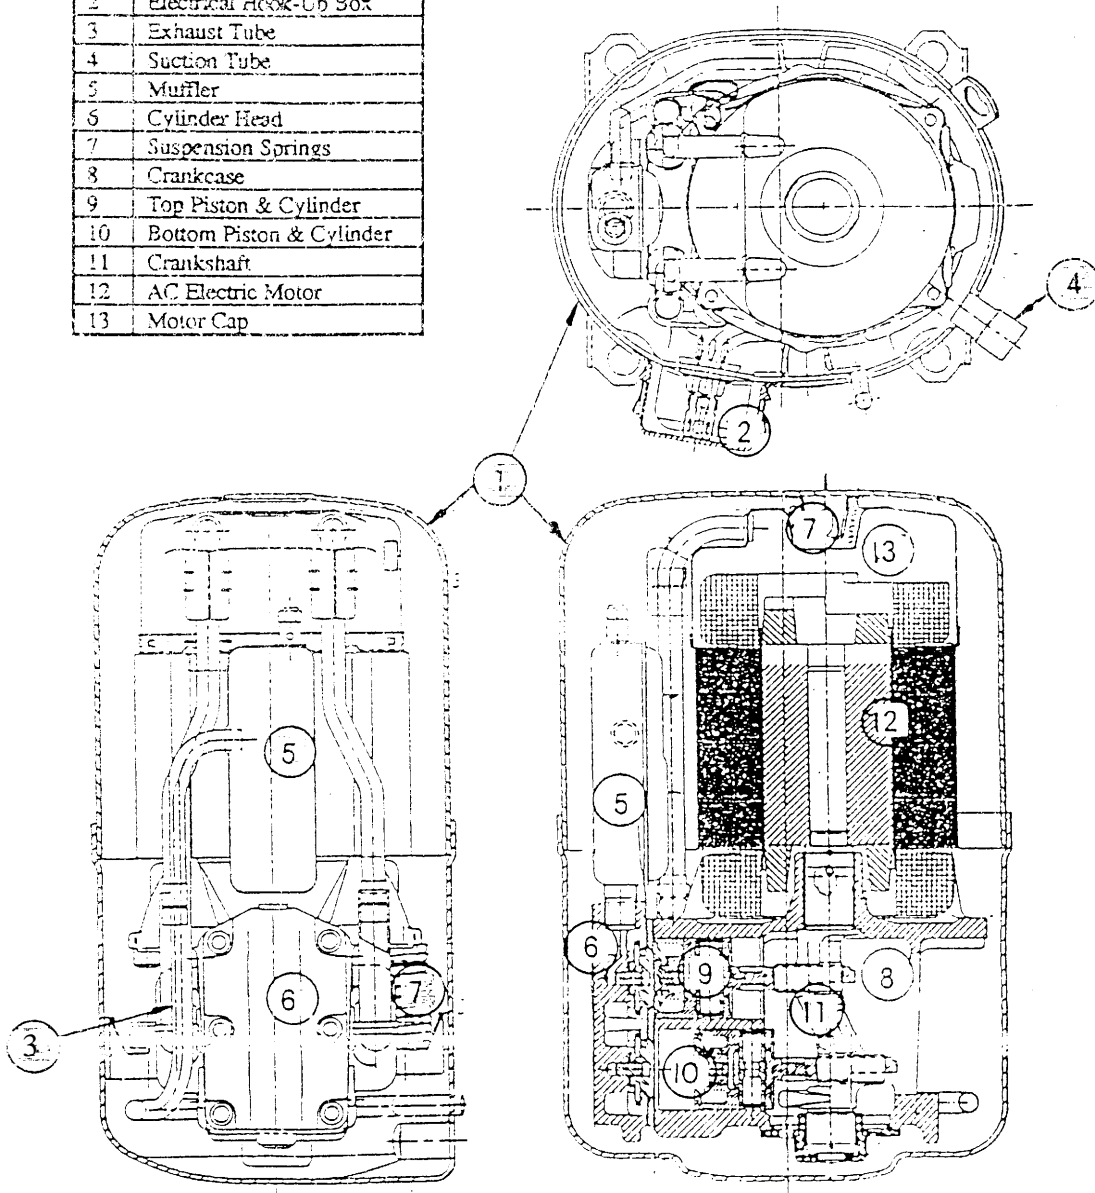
Internal components of the Bristol H25A Compressor. (From Zheng [7])
